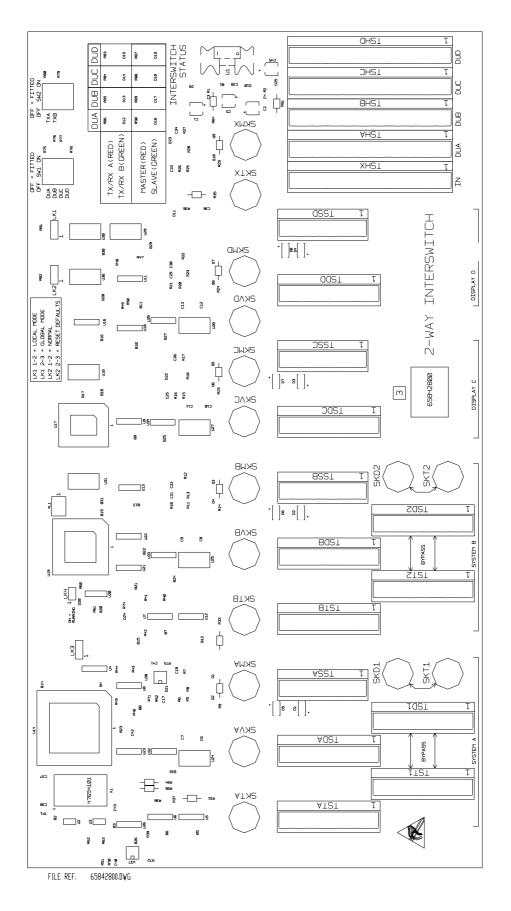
2-Way Interswitch Unit – Installation Drawing
